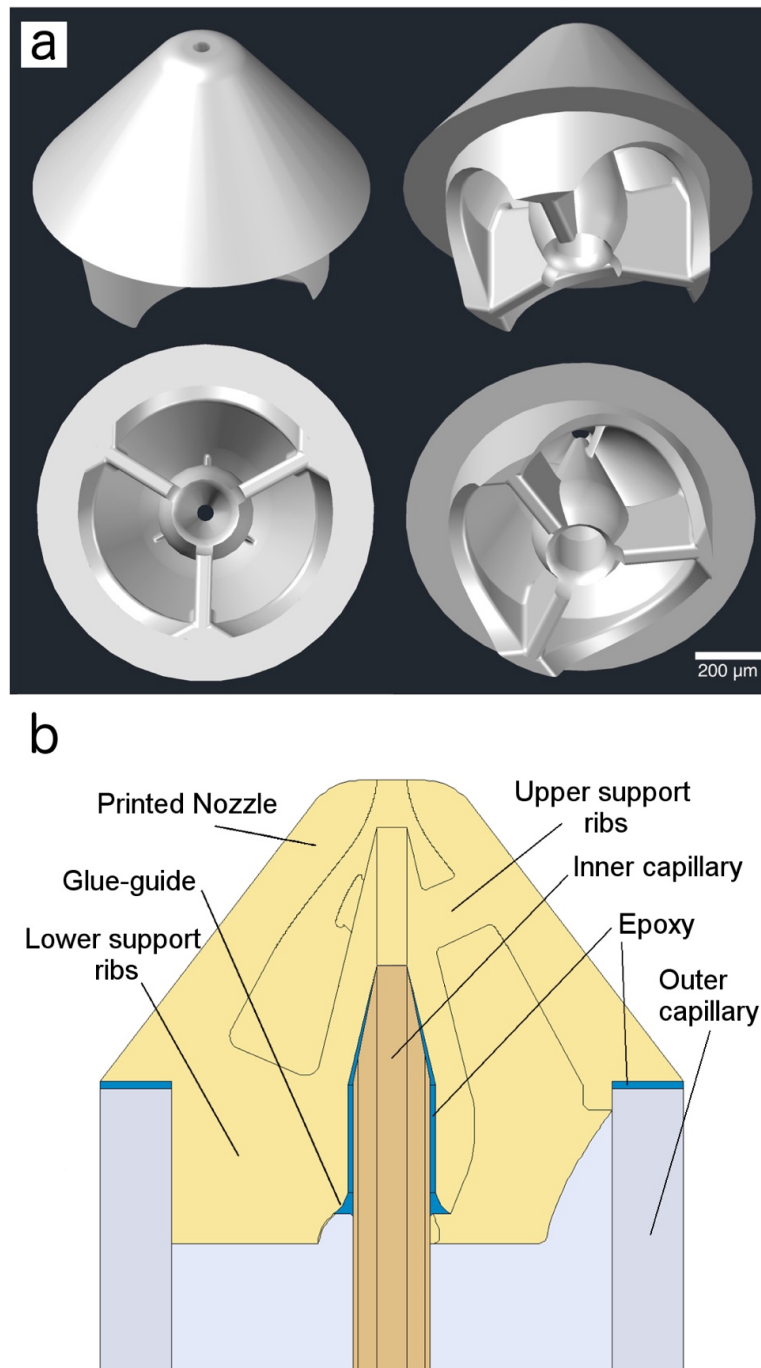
(a) CAD renderings of nozzle design. (b) Cross section diagram of the printed nozzle tip assembly with both inner and outer capillaries glued into place.
